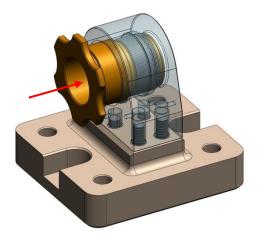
Locker Sleeve is inserted in the Locker Sleeve Housing. Run the Sleeve's thread into the internal thread in back of Housing.
